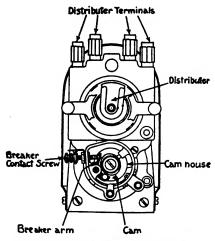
THE MAGNETO BREAKER AND DISTRIBUTOR
